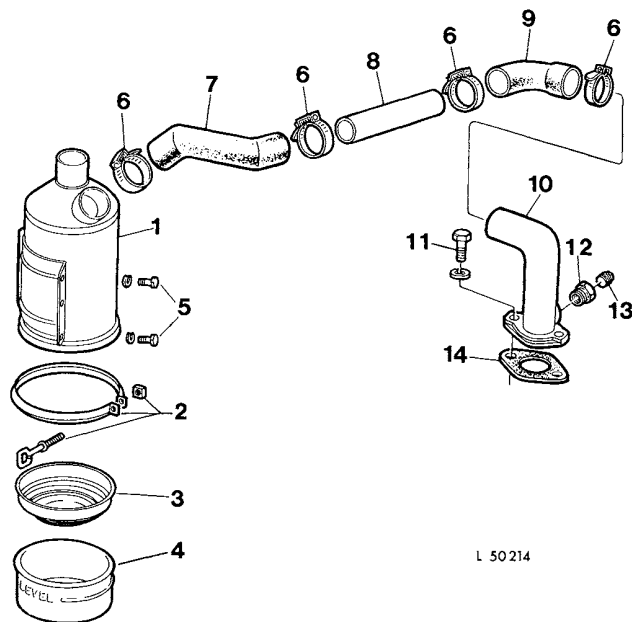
Oil-Bath Air Cleaner — Exploded View
